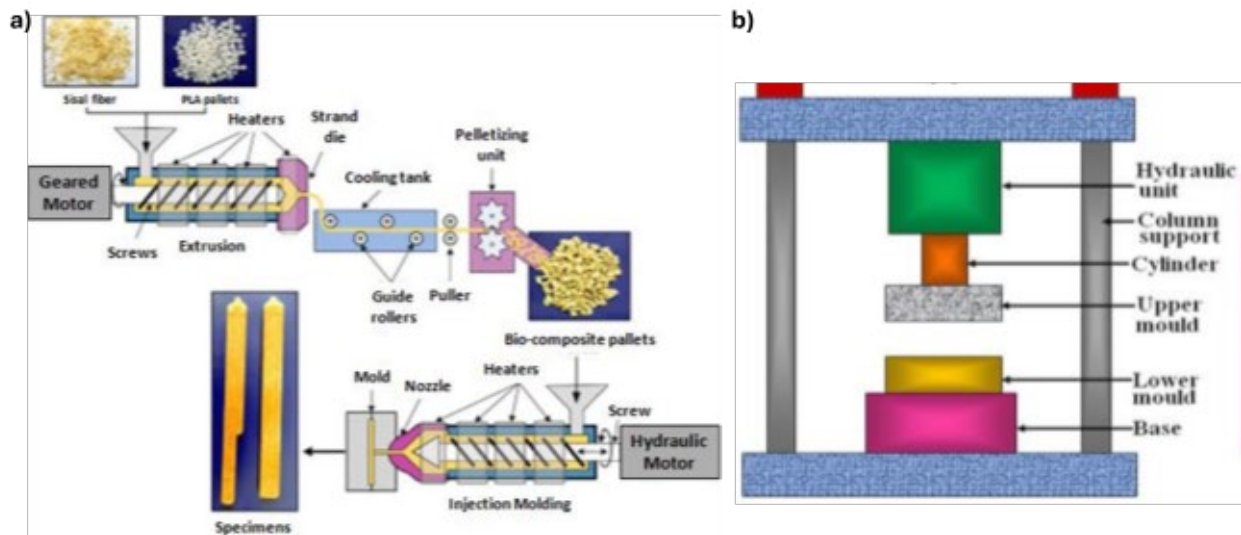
a) Injection molding versus Extrusion molding (Rabbi, Islam, et Islam 2021). b) Compressing molding (Sathish et al. 2021).
